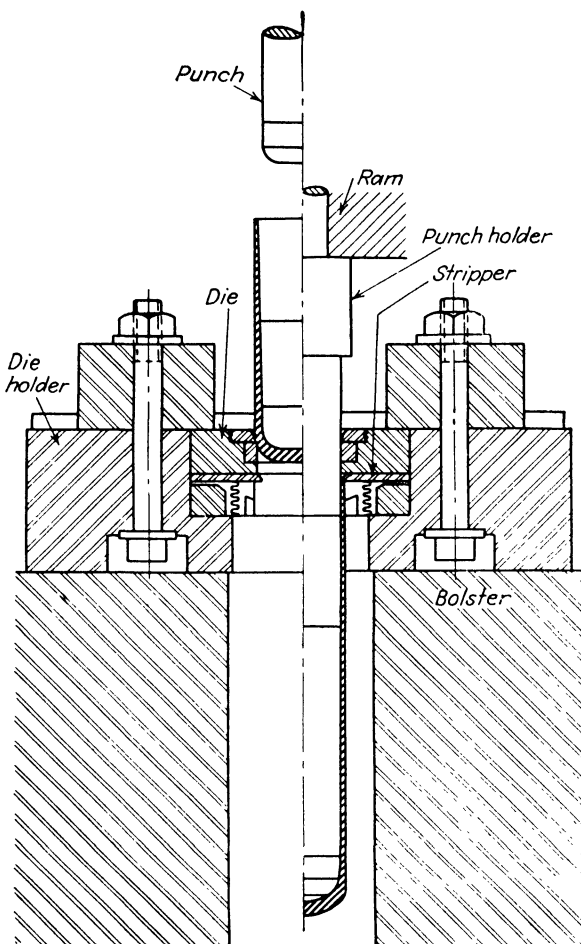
As the shell wall becomes thinner, the press pressure required is less, but the drawing speed must be reduced.
